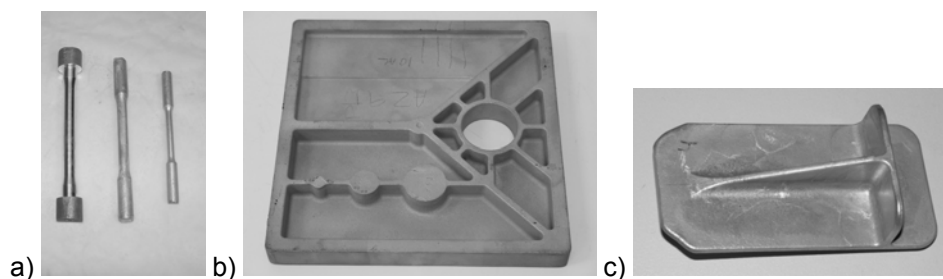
Magnesium parts cast in this work: a) tensile bars; b) test part; c) prototype.
